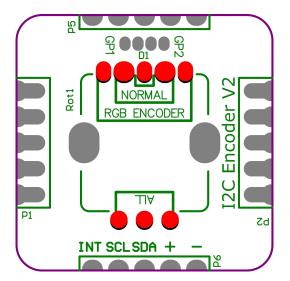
Used pins for mounting the RGB encoder  $% \left( {{\left[ {{{\rm{GB}}} \right]}_{\rm{COM}}} \right)$
